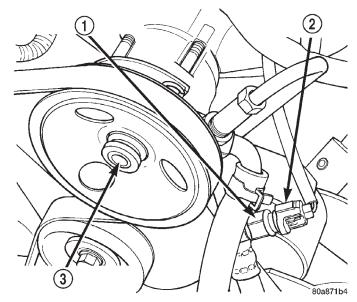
Power Steering Pump Pressure Switch—2.5L Engine
